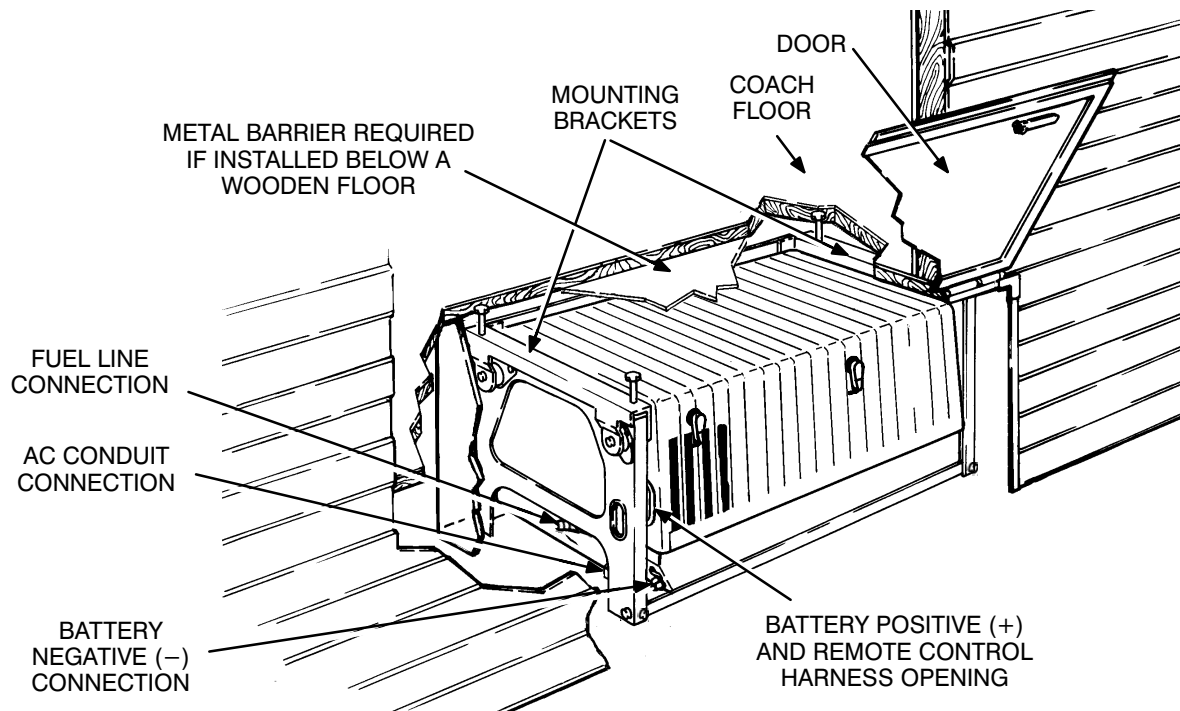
TYPICAL UNDER-FLOOR INSTALLATION
